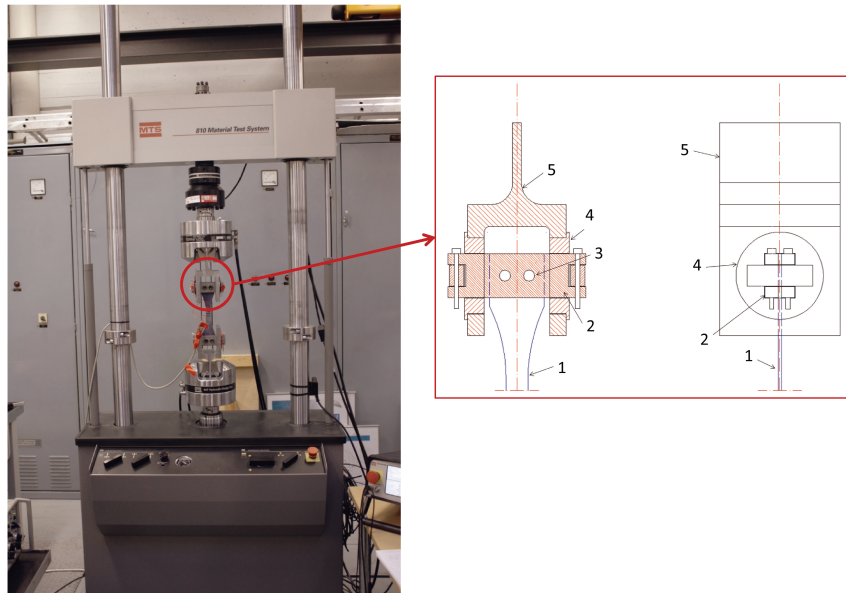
Test arrangement with the hydraulic test machine and the special rotating clamping jaws designed for testing the specimens with high angular misalignment (1 – test specimen, 2 – metal plates, 3 – bolts, 4 – joint that is allowed to rotate and 5 – jaw of the test machine) [P1].
